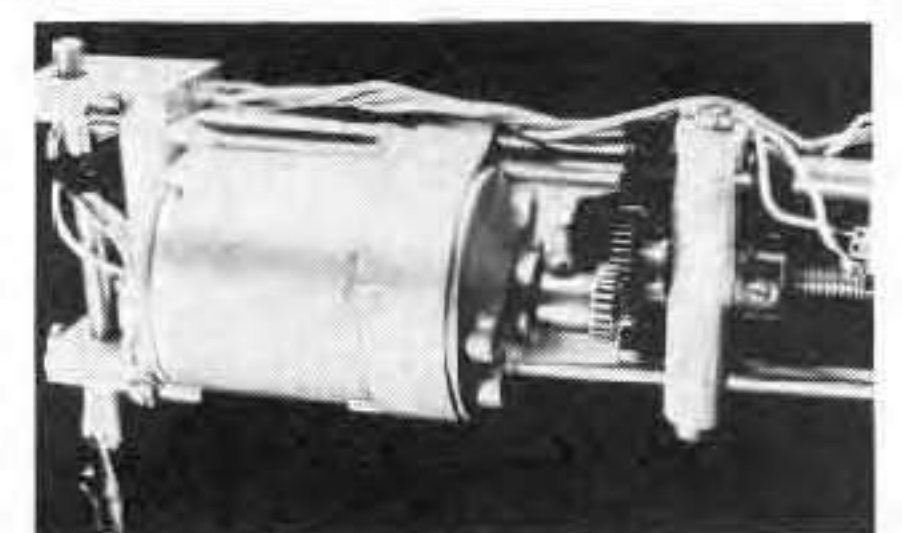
MOTOR AND GEAR arrangement used to drive threaded rod, as described in text.
